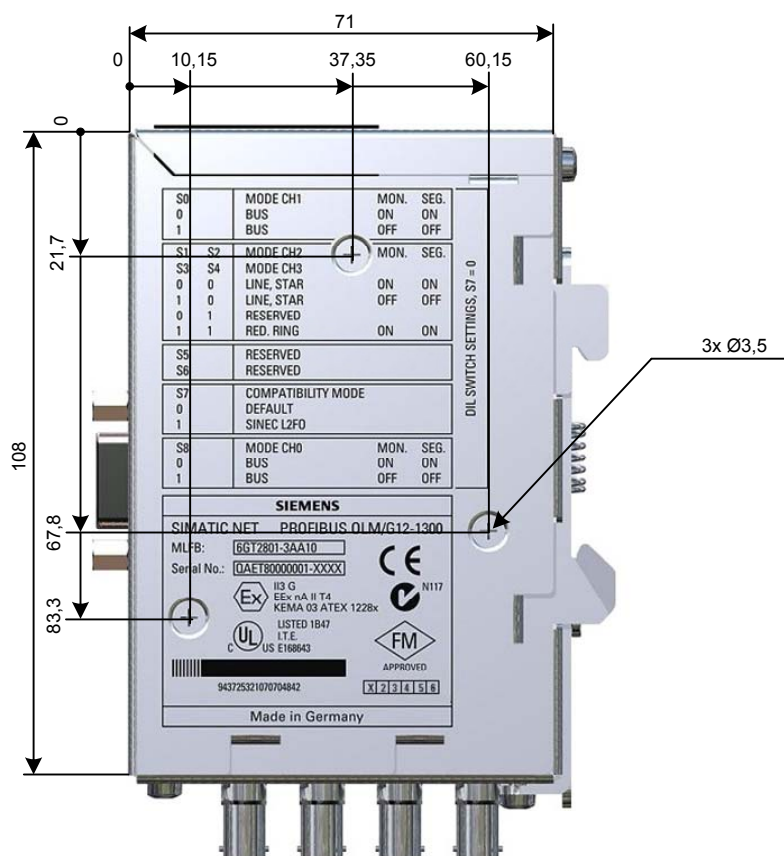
Drilling measures for the mounting plate, all dimensions are millimeter
